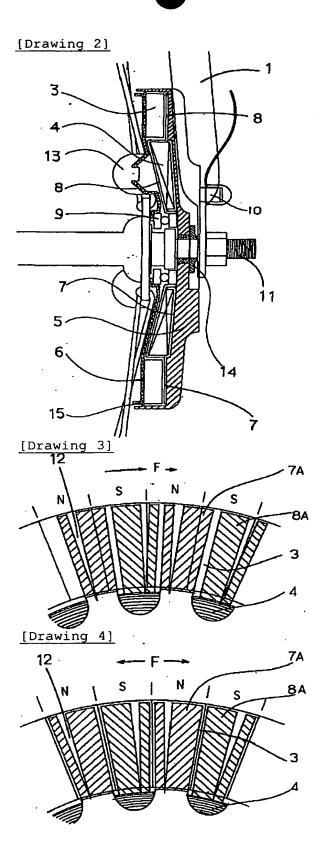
It is drawing of one example of the piece of York of this invention.
